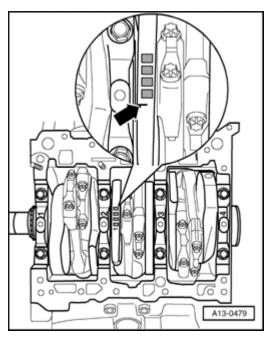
Application Of Crankshaft Bearing Shells For Bearing Caps Courtesy of VOLKSWAGEN UNITED STATES, INC.
